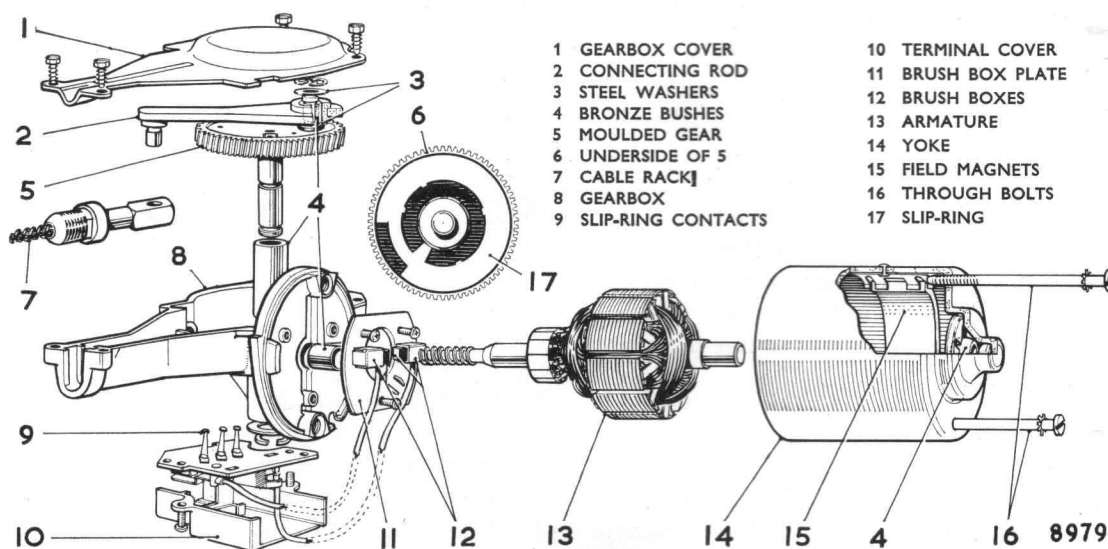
Exploded view of 12W Wiper Motor and Gearbox
